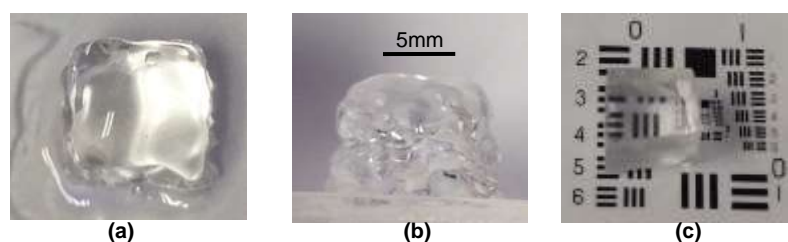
Two issues that limit the morphology of printed cubes (a) top view (b) side view (c) after polishing
